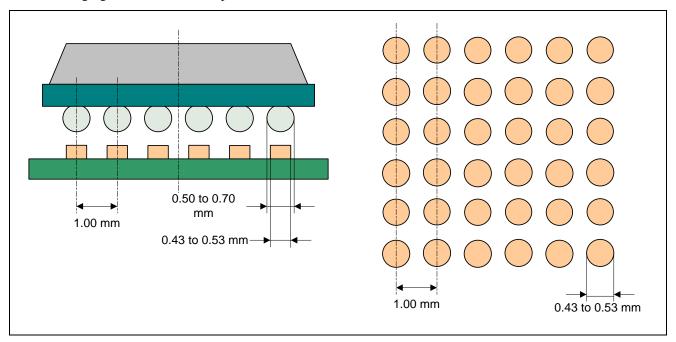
Mount Pad Sizes (23 mm Square BGA Package)
